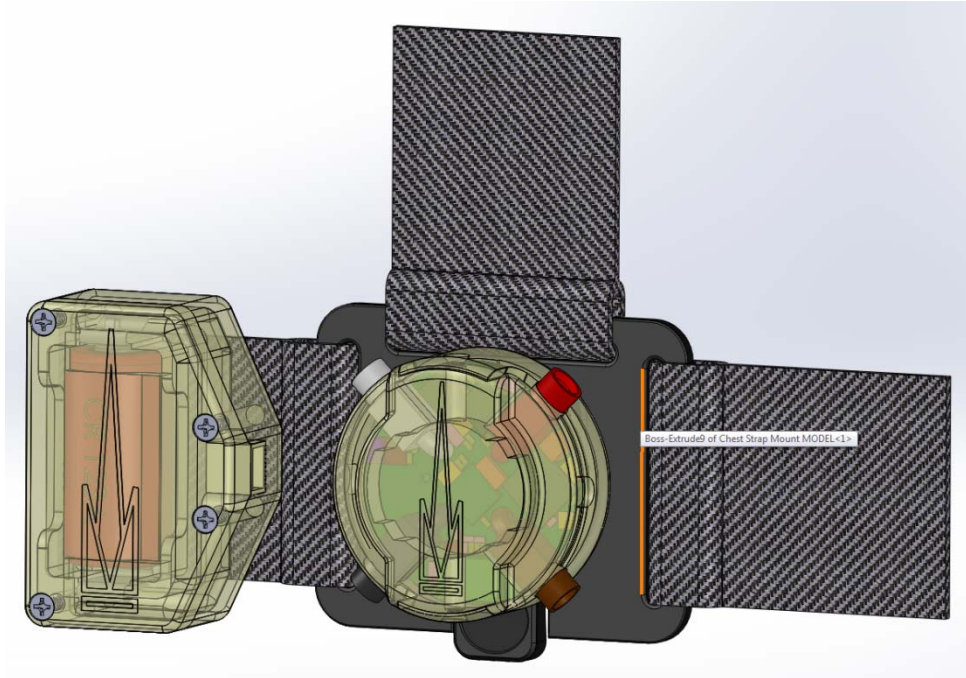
3D CAD drawing of the 3D printed enclosure and a booster battery pack mounted at approximately at the center mass on a shoulder harness.
